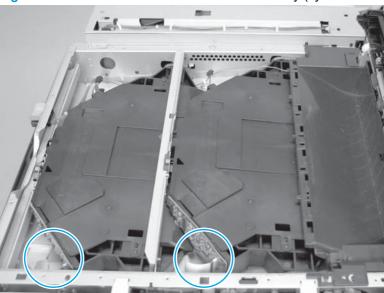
Remove the laser/scanner assembly (cyan and black; 8 of 8)
